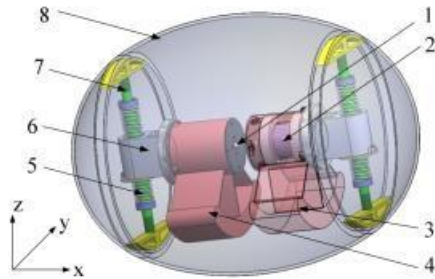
Mechanical structure of dual pendulum robot designed by Zhao: (1) Motor A; (2) Motor B; (3) Ballast B; (4) Ballast A; (5) Spring; (6) Linear Bearing; (7) Guide; (8) Outer Shell
